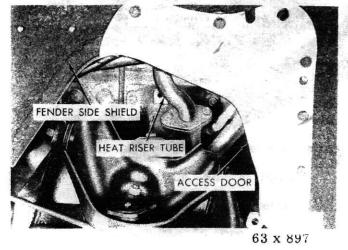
Exhaust Heat Riser Tube on FirePower 390 Engine
